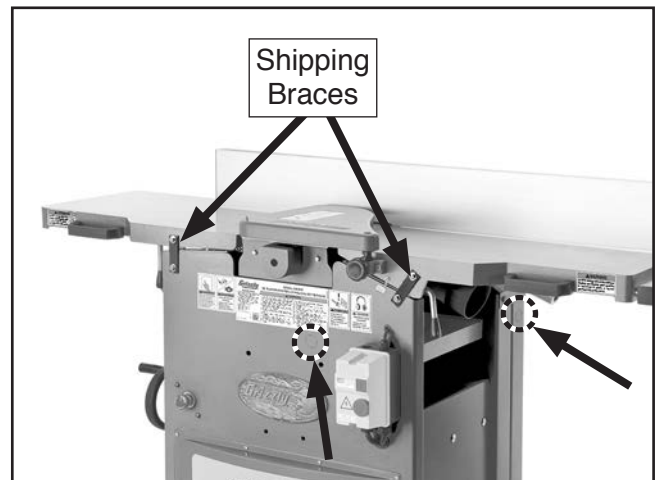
Locations of front and right rear lifting holes and shipping braces.
